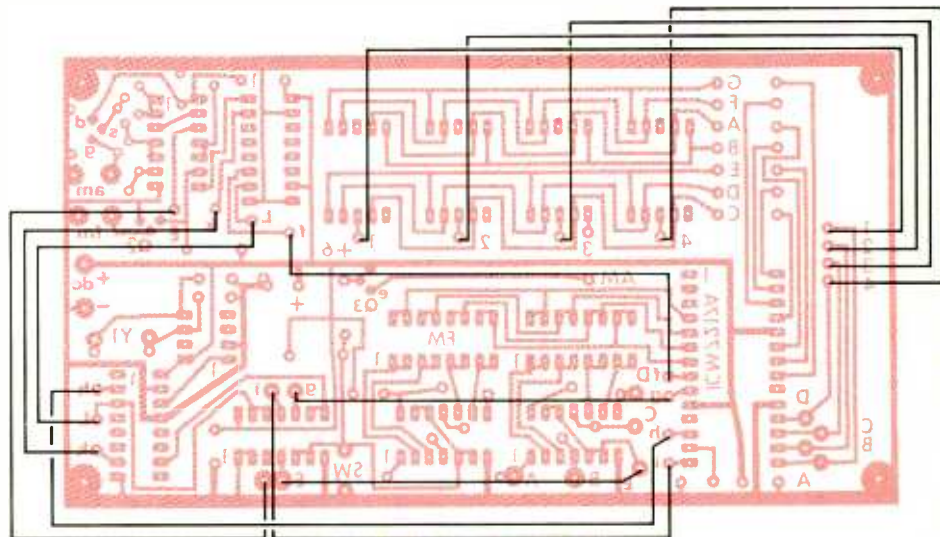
At left and below are additional jumpers of insulated wire to be installed on the display board. Use RG-174 coaxial cable to make the connections off the board.
